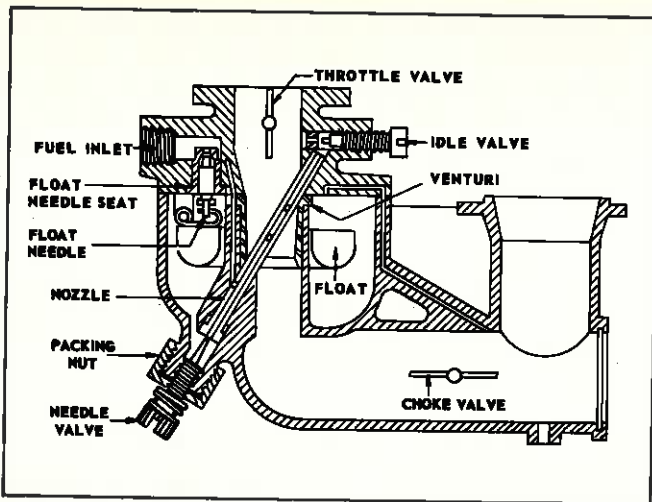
Typical Two Piece Flo-Jet Carburetor
